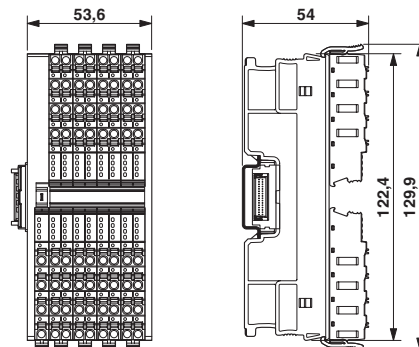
Nominal dimensions of the F housing with two terminal blocks (type F-2KF; e.g., AXL DI 16/4, AXL DO 16/3)
